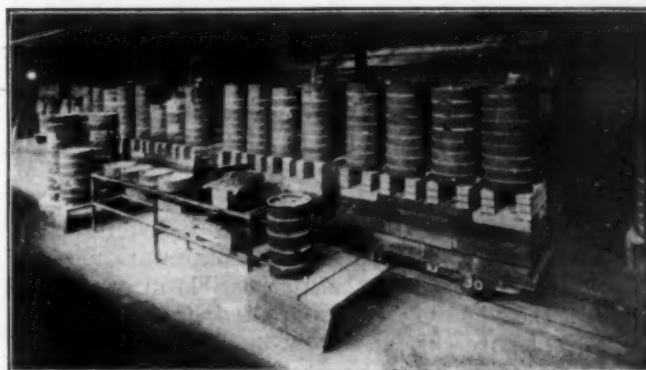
CARS ON TRACK ALONGSIDE OF TUNNEL KILN
